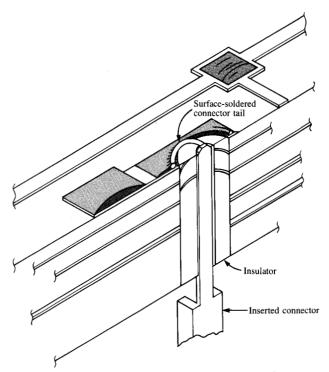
Cross section of TCM board showing nonredundant bond pad printed-circuit configuration with a special insulated connector inserted and its tail soldered to the remaining, previously deleted, LST.
